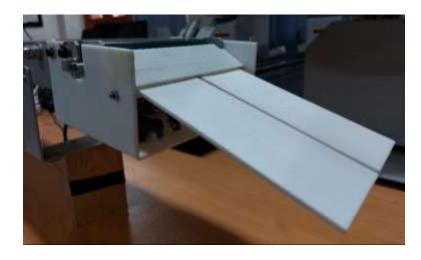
Prototype V2 Flap Assembly integration with conveyor belt (Image)
